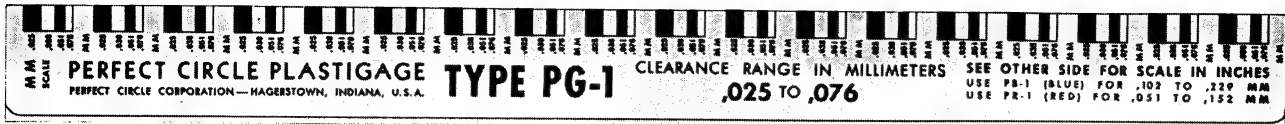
« Plastigage » calibrated wire for checking crankshaft bearing shell-to-journal clearance, and envelope with graduation scale.
